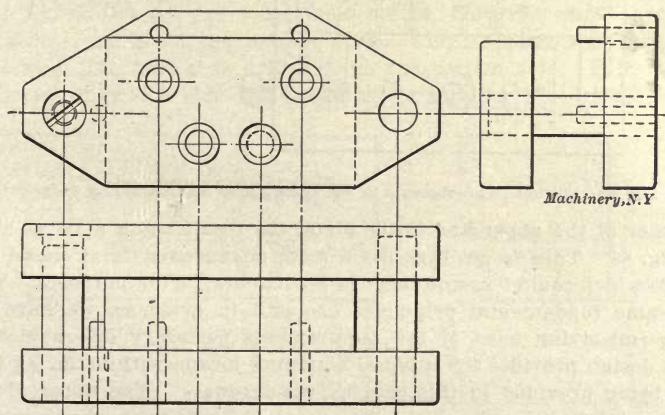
Jig in Fig. 84 Improved by adding Locating Pins
